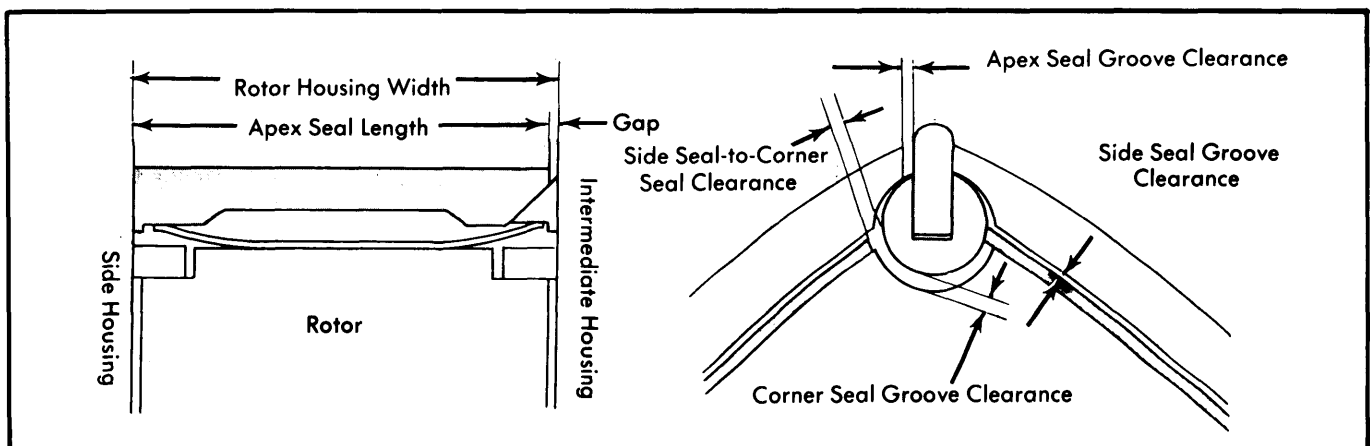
Measuring Clearance of Apex, Side & Corner Seals
